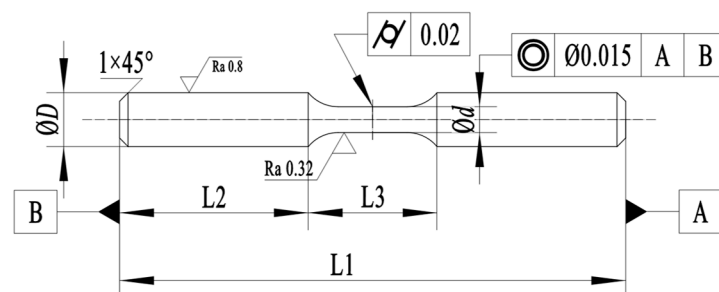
Specimen geometry and size for the rotating bending fatigue test.
